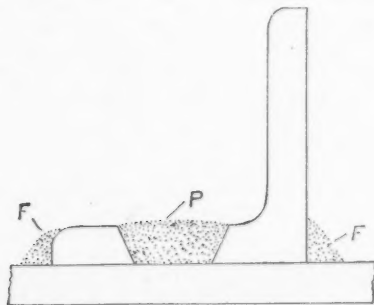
SECTIONAL VIEW OF PLUG WELD
